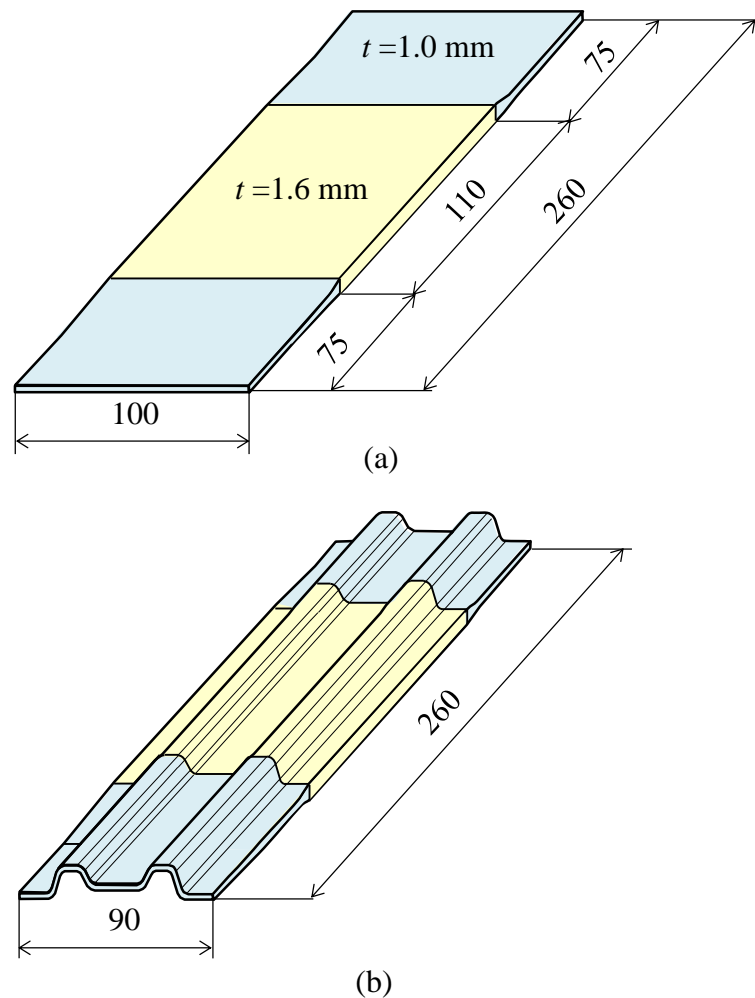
Dimension of (a) tailored blank and (b) hot-stamped rail roof.
